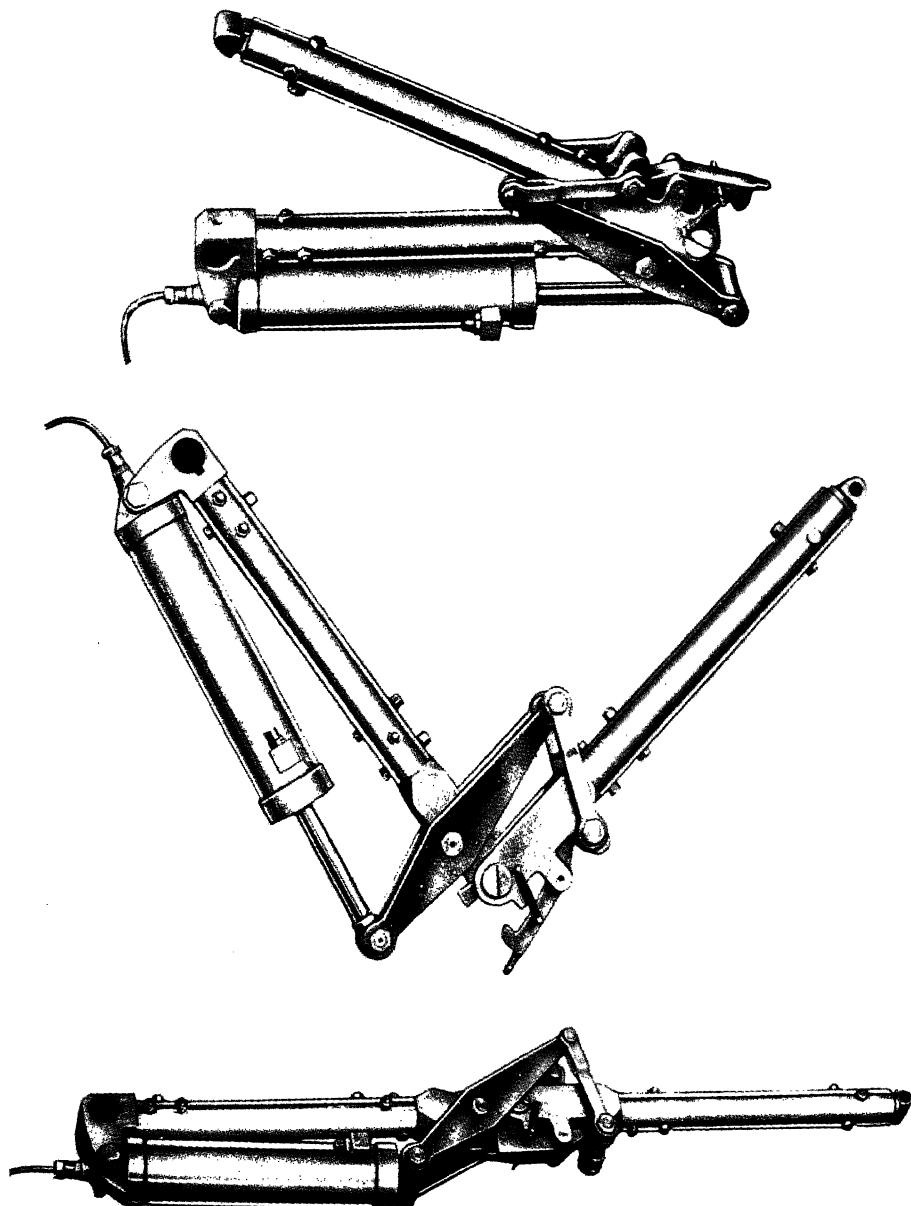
Nutcracker Strut on Undercarriage shown in Fig. 60
